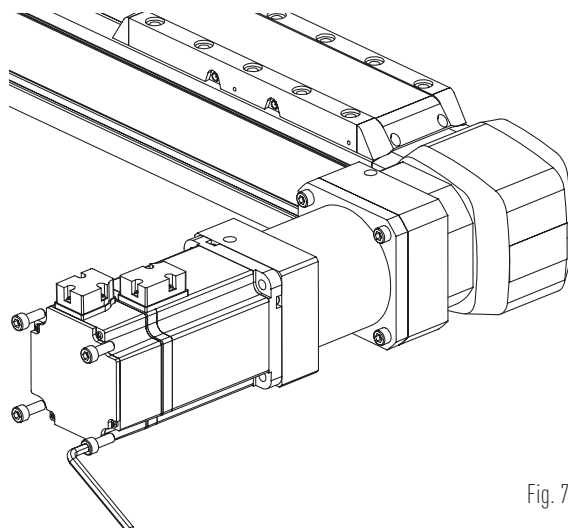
Bolting the motor to the HM-B linear axis with gears
